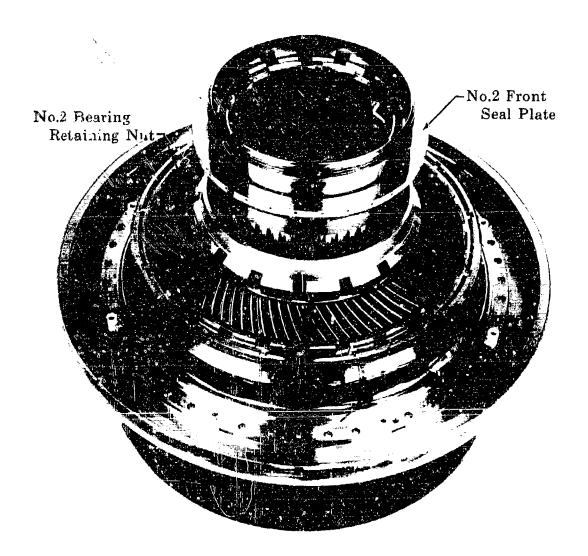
No. 2 Hub, Sent, Bearing and FD 15613 Shaft Assembly
